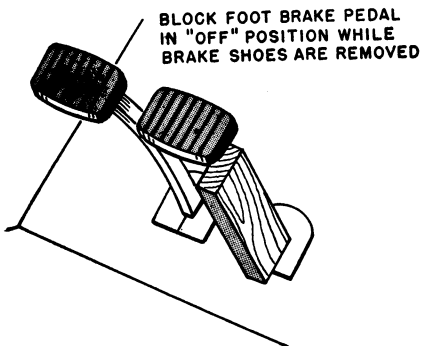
Method of blocking brake pedal to avoid loss of brake fluid while hydraulic system is open
